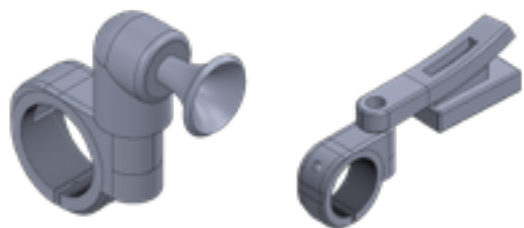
SolidWorks impression of electric horn on locking and of detached indicator on arm
